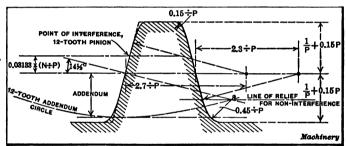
Hob Tooth designed to generate the Approximate Shape of a $14\frac{1}{2}$ -degree Involute Milled Tooth
